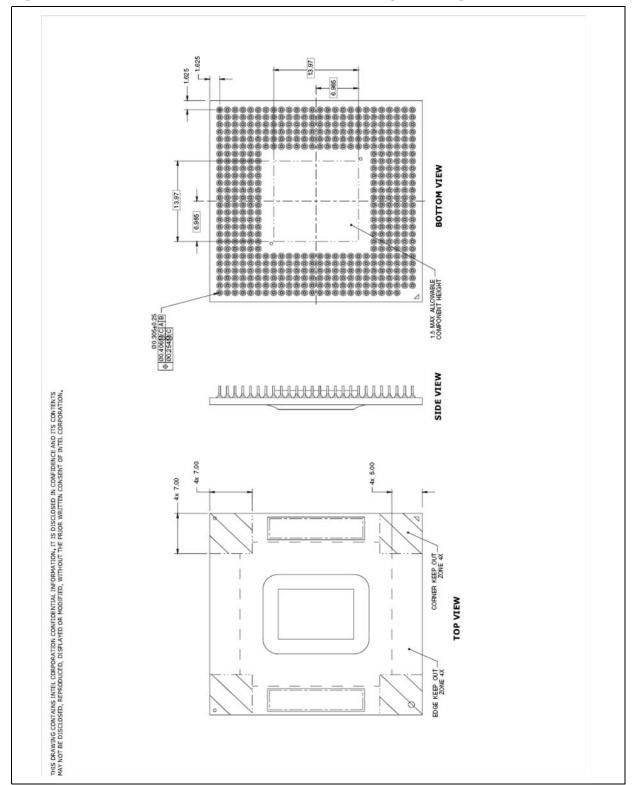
1-MB on 6-MB Die (SV) Micro-FCBGA Package Drawing (Sheet 1 of 2)
